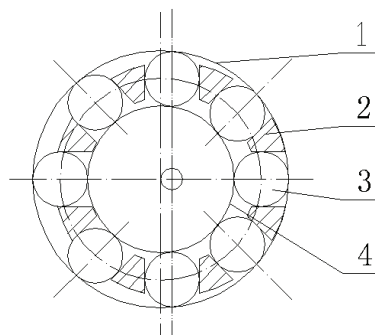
The principle abridged drawing of the same width, single-action, double-output, variable displacement pump and motor with double-stators and single-roller
